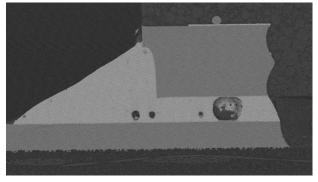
Typical solder joint cross-section on the 1st TV. Note the step cut in the lead resulting in a wettable flank.
